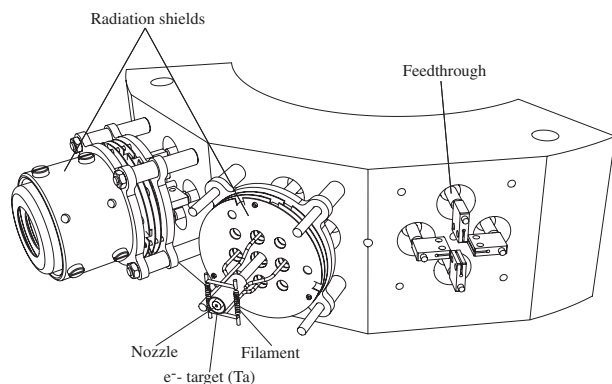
Drawing of the nozzle holder. The left nozzle-assembly is complete. From the middle nozzle, the radiation shields are taken off to illustrate heating devices. The right assembly shows the copper supports for the filaments and the electron beam target.
